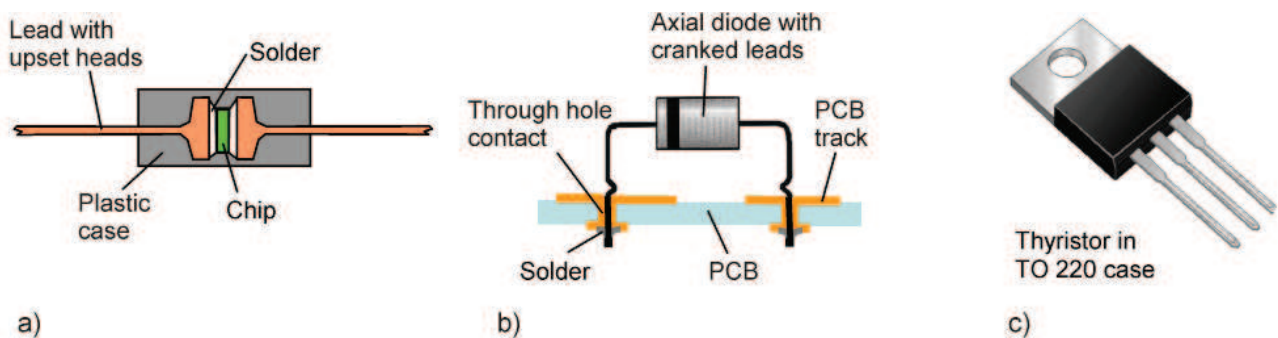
a) Structure of an axial diode (diagram); b) Mounting of axial diode on a PCB; c) Wired component with cooling and mounting plate
